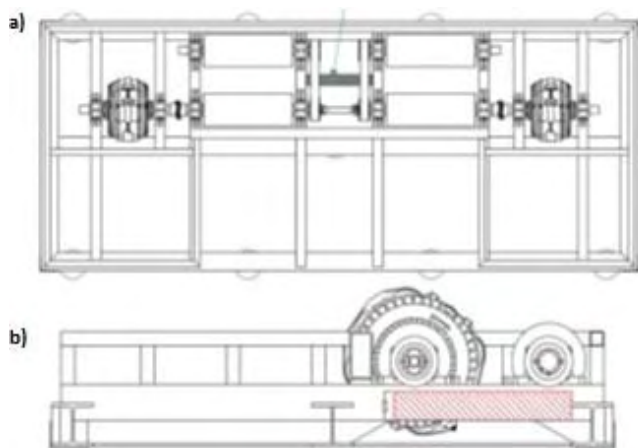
Technical drawing of the low part of mobile dynamometer with the location of brakes and rollers: a) top view; b) side view
